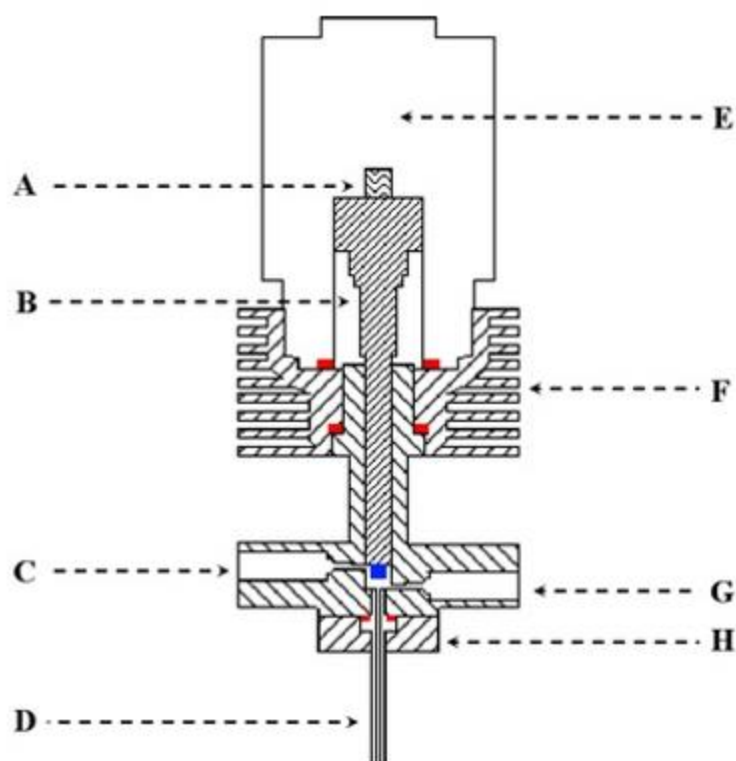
Cross-sectional drawing of the ROLSI™ (in open position): A – spring; B – vespel sealing seat; C – carrier gas inlet; D – capillary; E – electromagnet; F – cooling fins, G – carrier gas outlet; H – capillary sealing support, Blue marker – polymer seal; Red marker – O-rings (Nelson, 2012).
